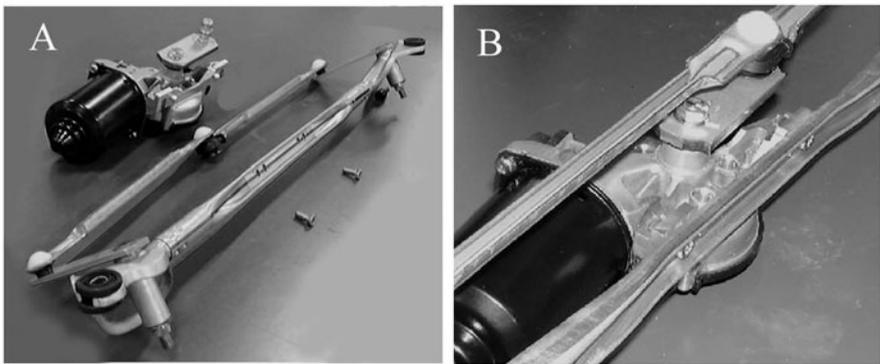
Wiper driving system assembly with split motor (A) and detail of the motor connection to drive crank (B).
